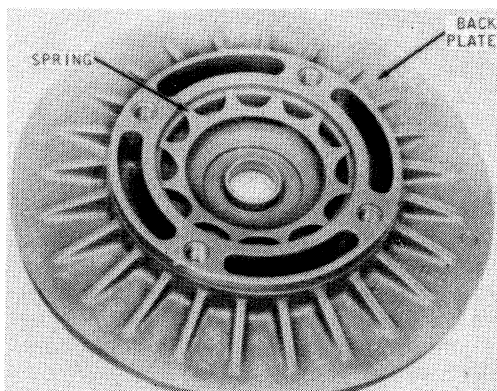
On AiResearch turbocharger, back plate and spring must be renewed as an assembly if either is damaged. Do not remove spring from back plate.
